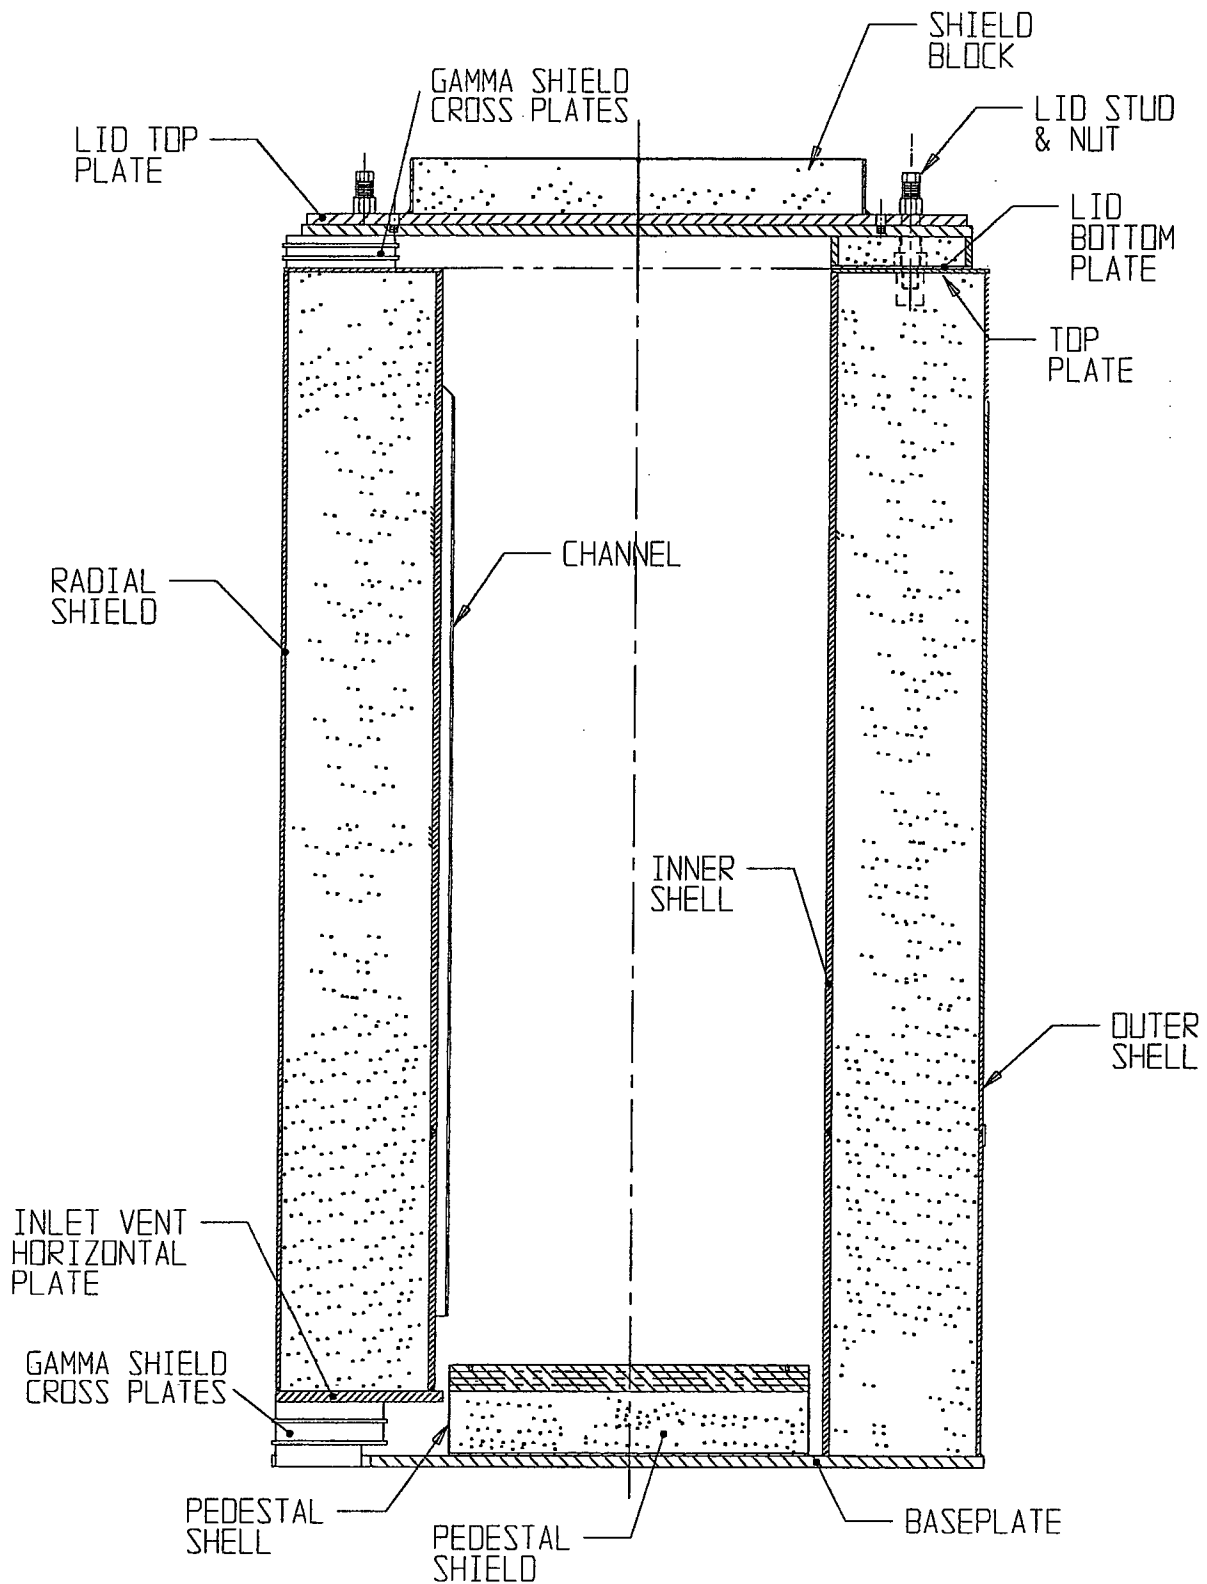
A; HI-STORM 100S OVERPACK CROSS SECTIONAL ELEVATION VIEW
